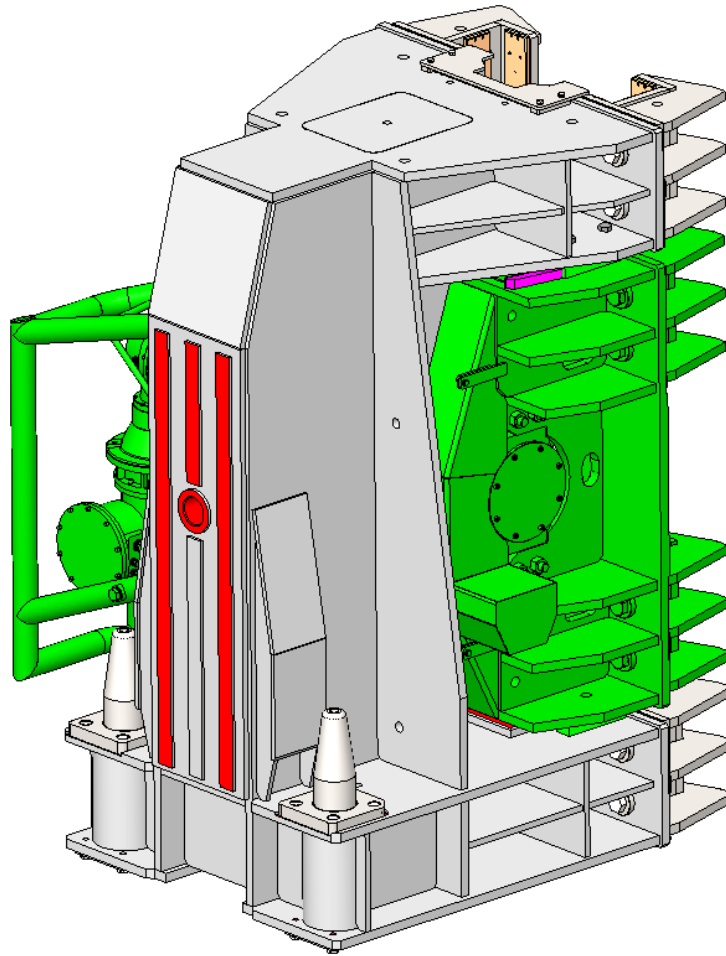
Carriage Arrangement (Carriage Body and Drive Cradle)
